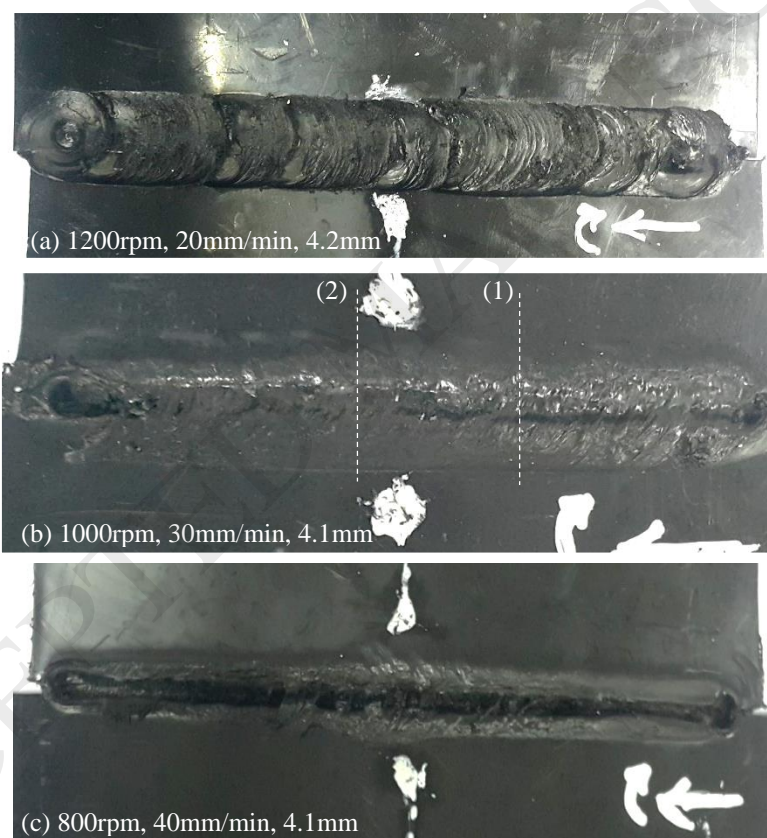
Weld line appearances (a) uniform with striations, (b) uniform with surface melting, and (c) groove. Welding conditions are as indicated.
